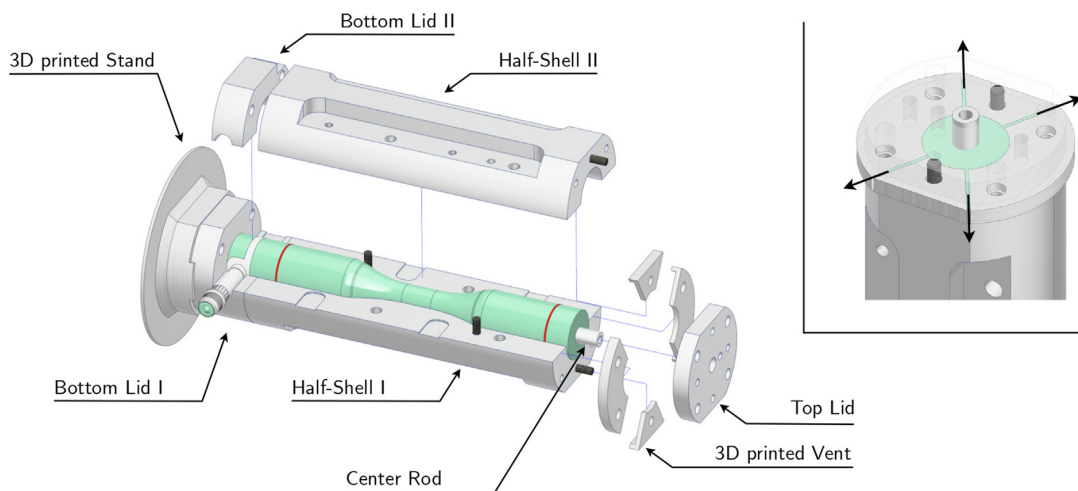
Final mold configuration. The mold is filled in an upright position. Venting channels are provided by 3D printed parts. The center rod is pressed out of the closed mold with a hydraulic press. The cured specimens are cut at the indicated red lines after demolding.
